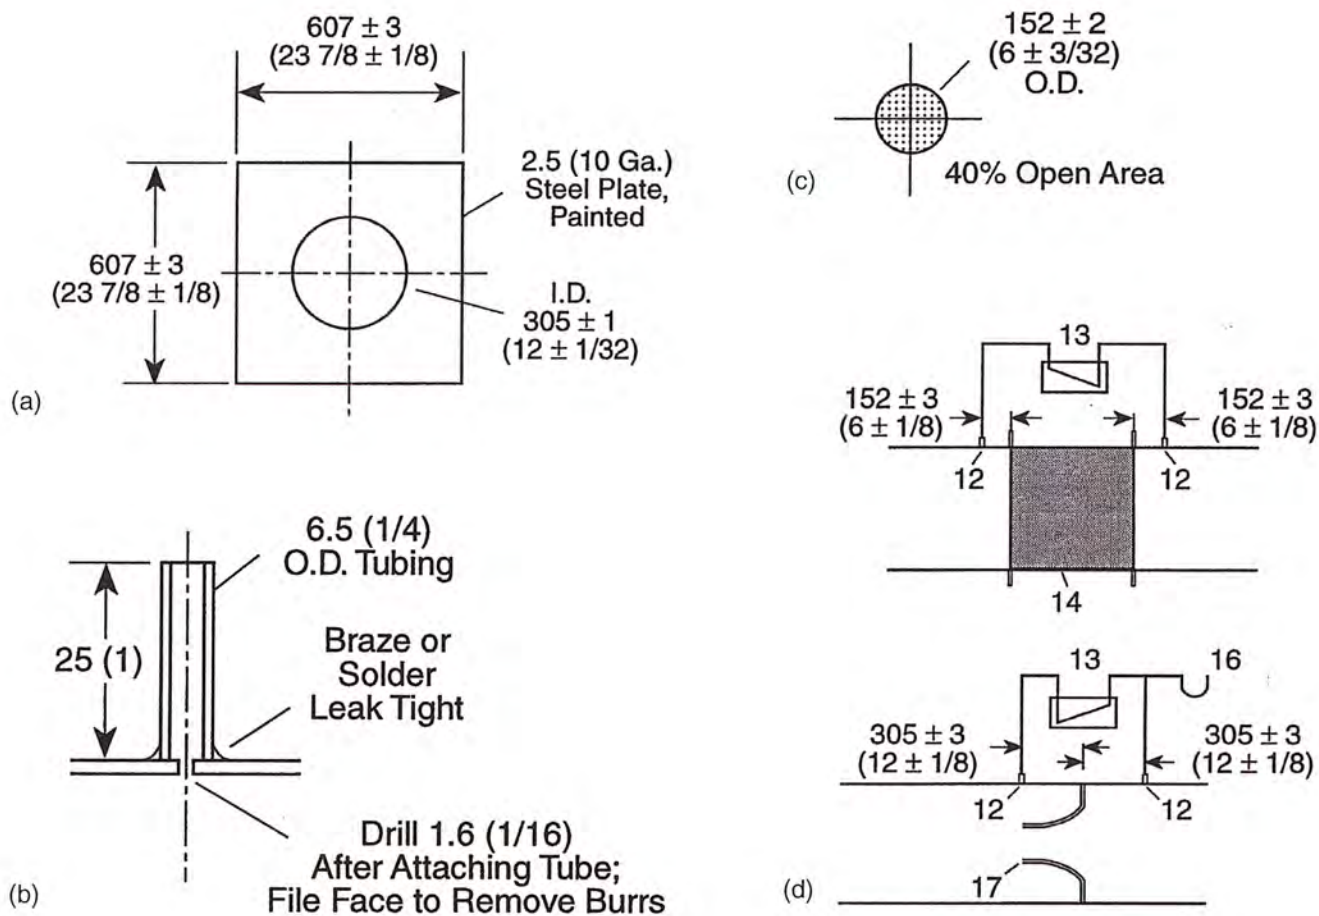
Details of test duct components. Dimensions are in mm (in.).
